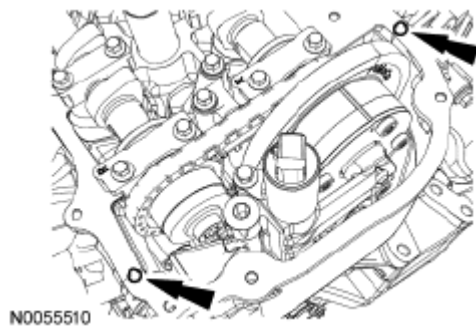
Locating Engine Front Cover-To-RH Cylinder Head Joints
